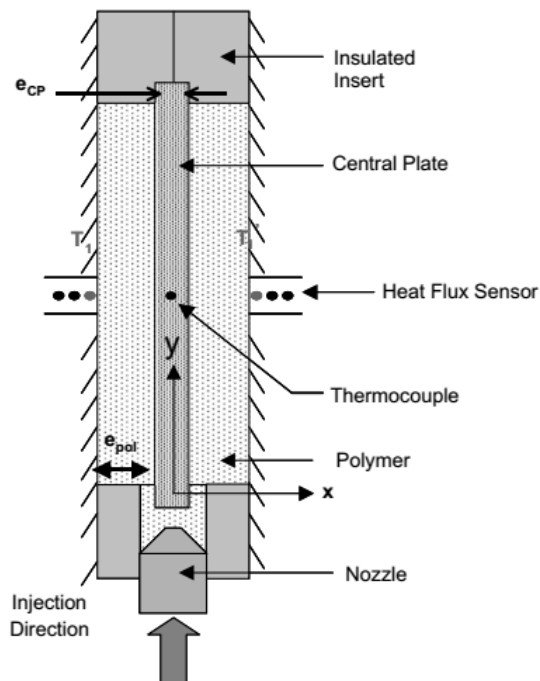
Mold cavity with a central plate which contains a thermocouple [Gof09]
